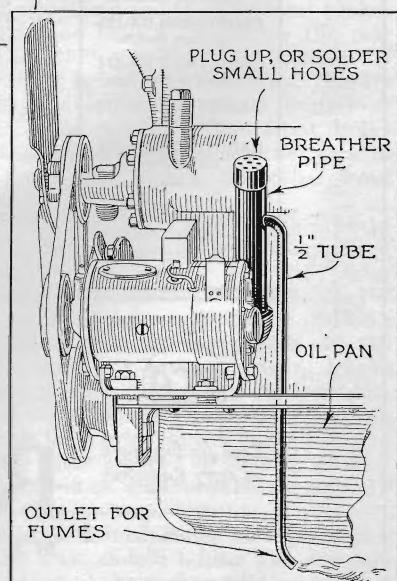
A half-inch pipe, fastened into the side of the oil filler pipe and brought downward, carries off crank case fumes.
